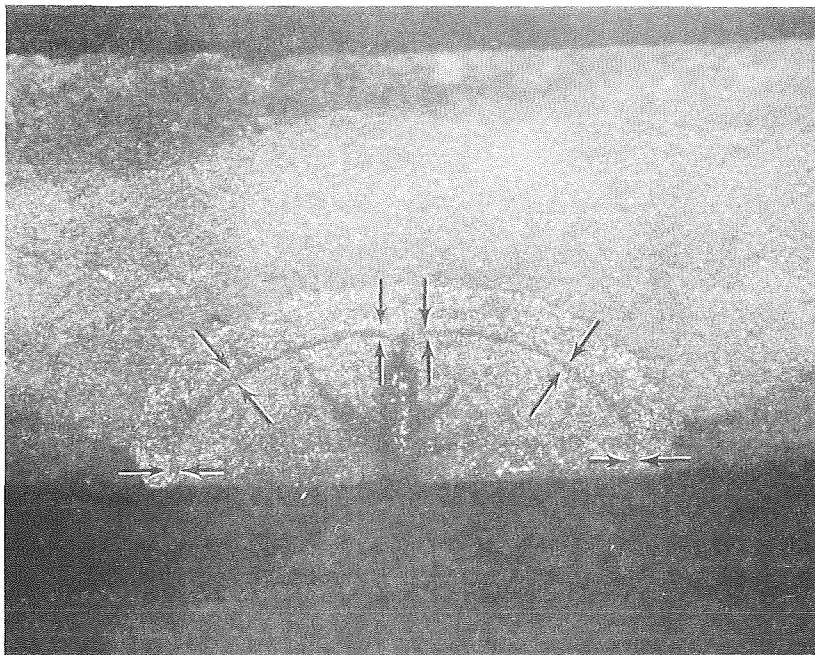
Fracture Face of Specimen Showing Small Uniform Growth (specimen 9CP-45; 0.090-inch; LN₂)
